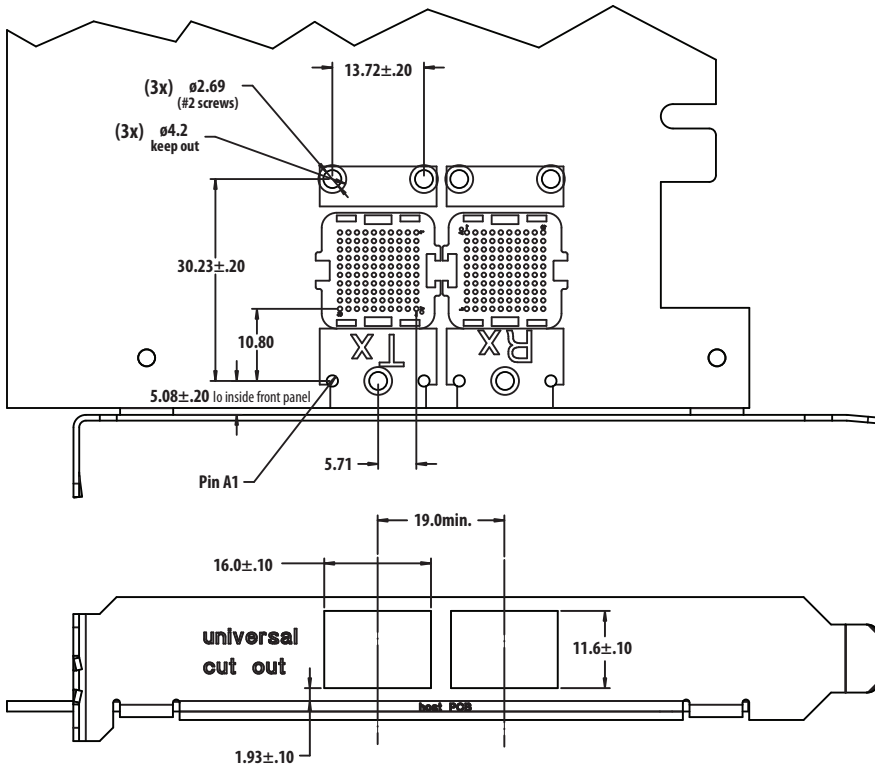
Package Outline AFBR-775BEPZ and AFBR-785BEPZ
